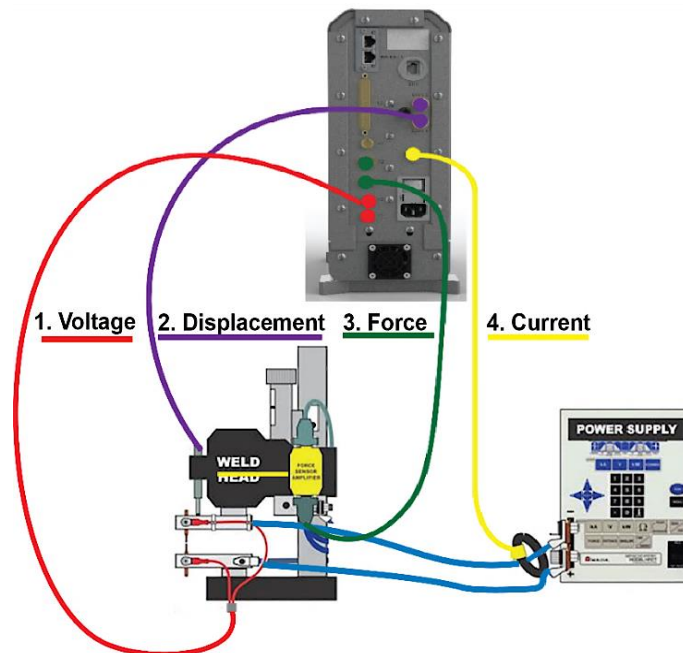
Single Head, Opposed Weld Connectivity
